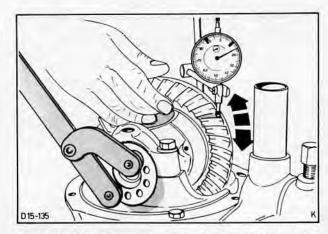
Set backlash, turning crown wheel to and fro by hand
